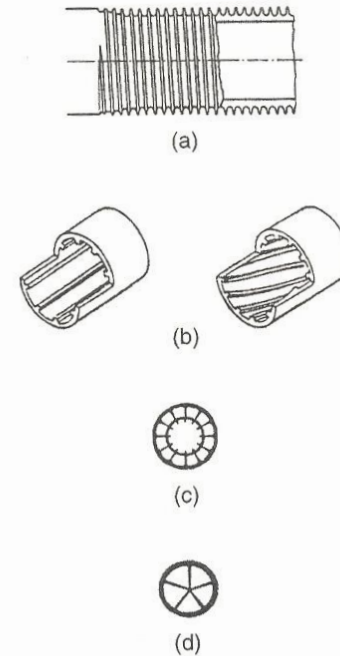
(a) Integral fins on outer tube surface, (b) internally finned tubes (axial and helical fins), (c) cross sections of multiply internally finned tubes, (d) tube with aluminum star insert.
